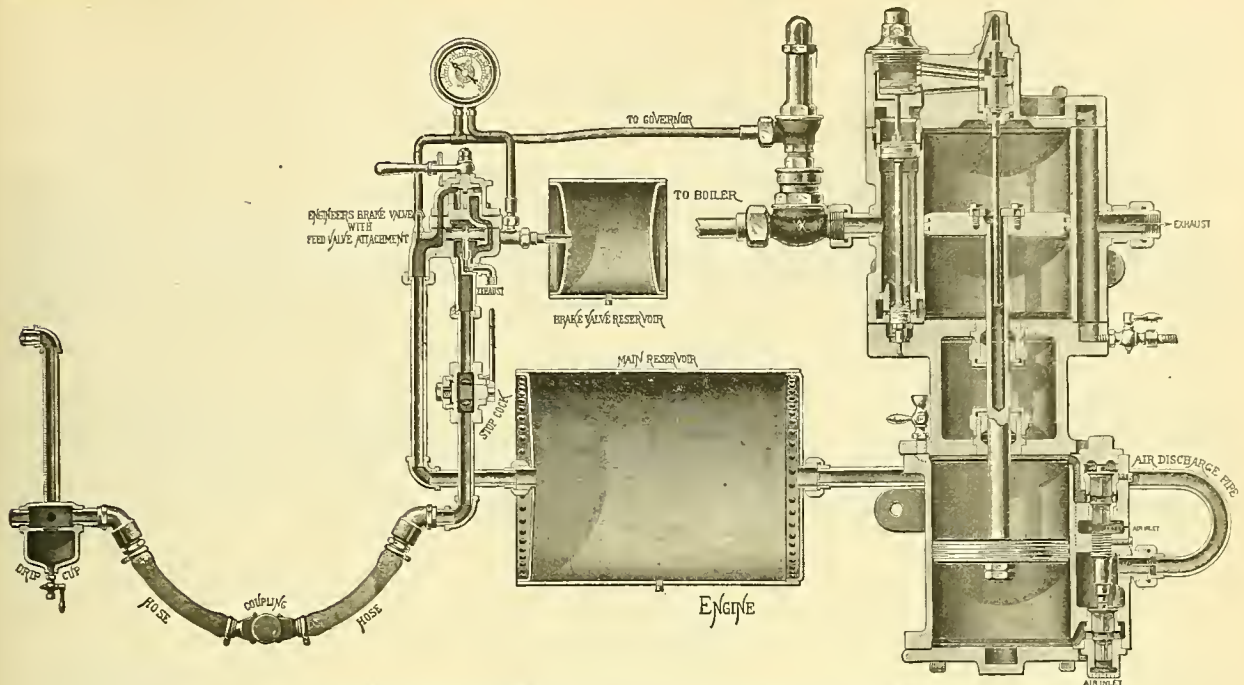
Sectional View showing general Arrangement of Apparatus.
